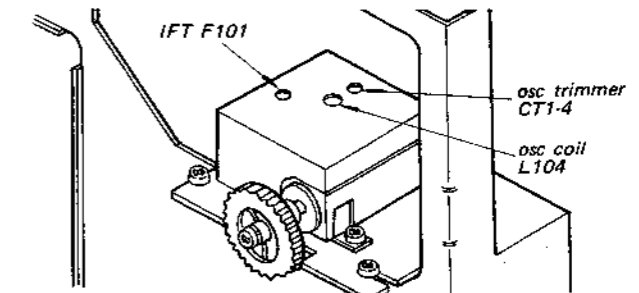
Fm tuner block adjustments on fm tuner block
